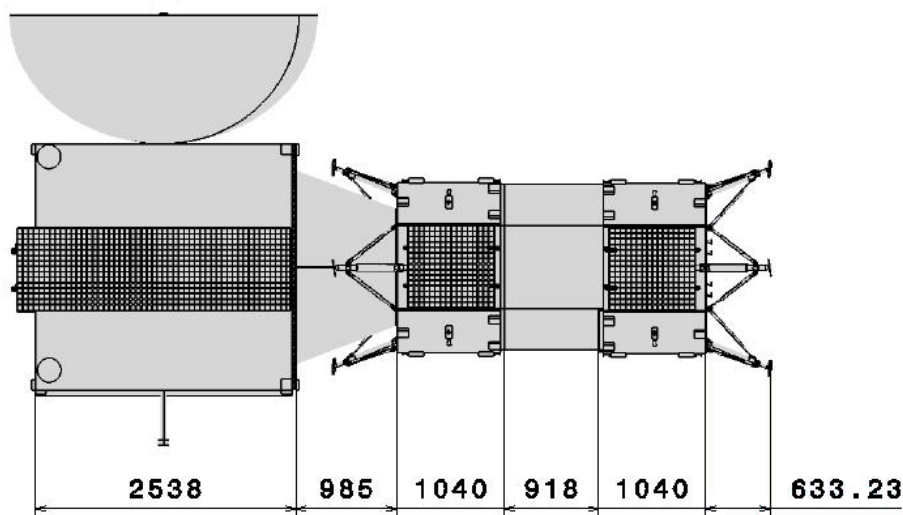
A drawing of the spacecraft bus with its dimensions.
